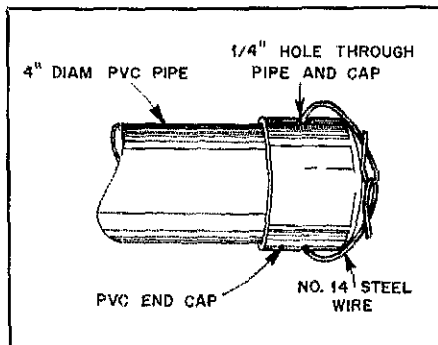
K1KI's crushproof carrier for DXpedition antennas consists of less than \$8 worth of PVC pipe, end caps and wire. This drawing shows one end of the assembly.
